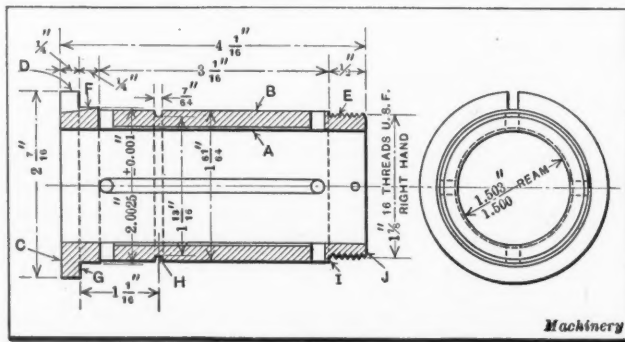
Clutch Throw-out Sleeve on which Turning, Facing, and Threading Operations are performed on a Bardons & Oliver No. 4 turret lathe
